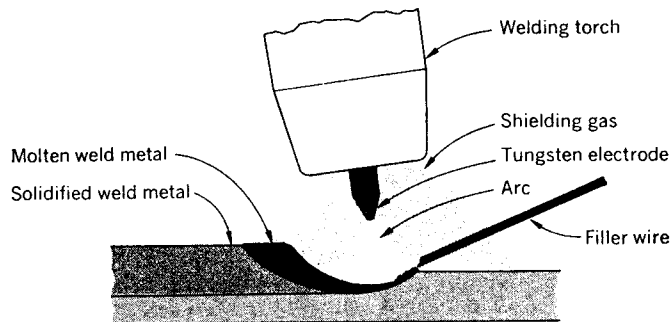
Gas Tungsten-Arc Welding, GTAW (1)
